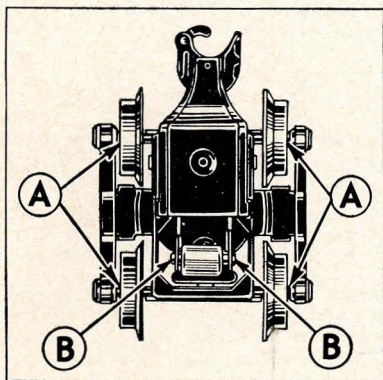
Underside of Car Truck. Lubricate Axle Bearings (A) and Roller Bearings (B)
